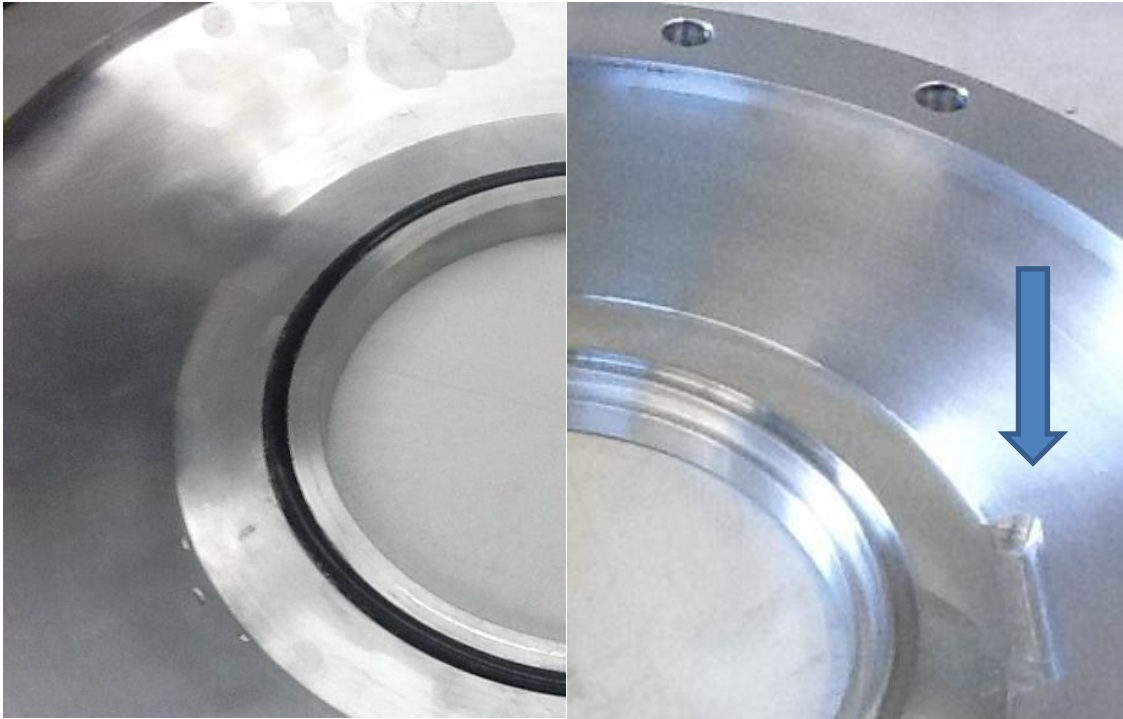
(Left) Original plate, with installed O-ring seal. (Right) Widened, counter bored plate with rectangular relief feature (shown by blue arrow) on right side.
